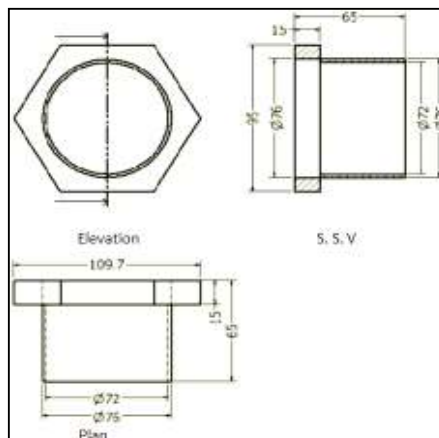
Elevation, Plan and side view section of Extruder Base, Dims. in mm.
